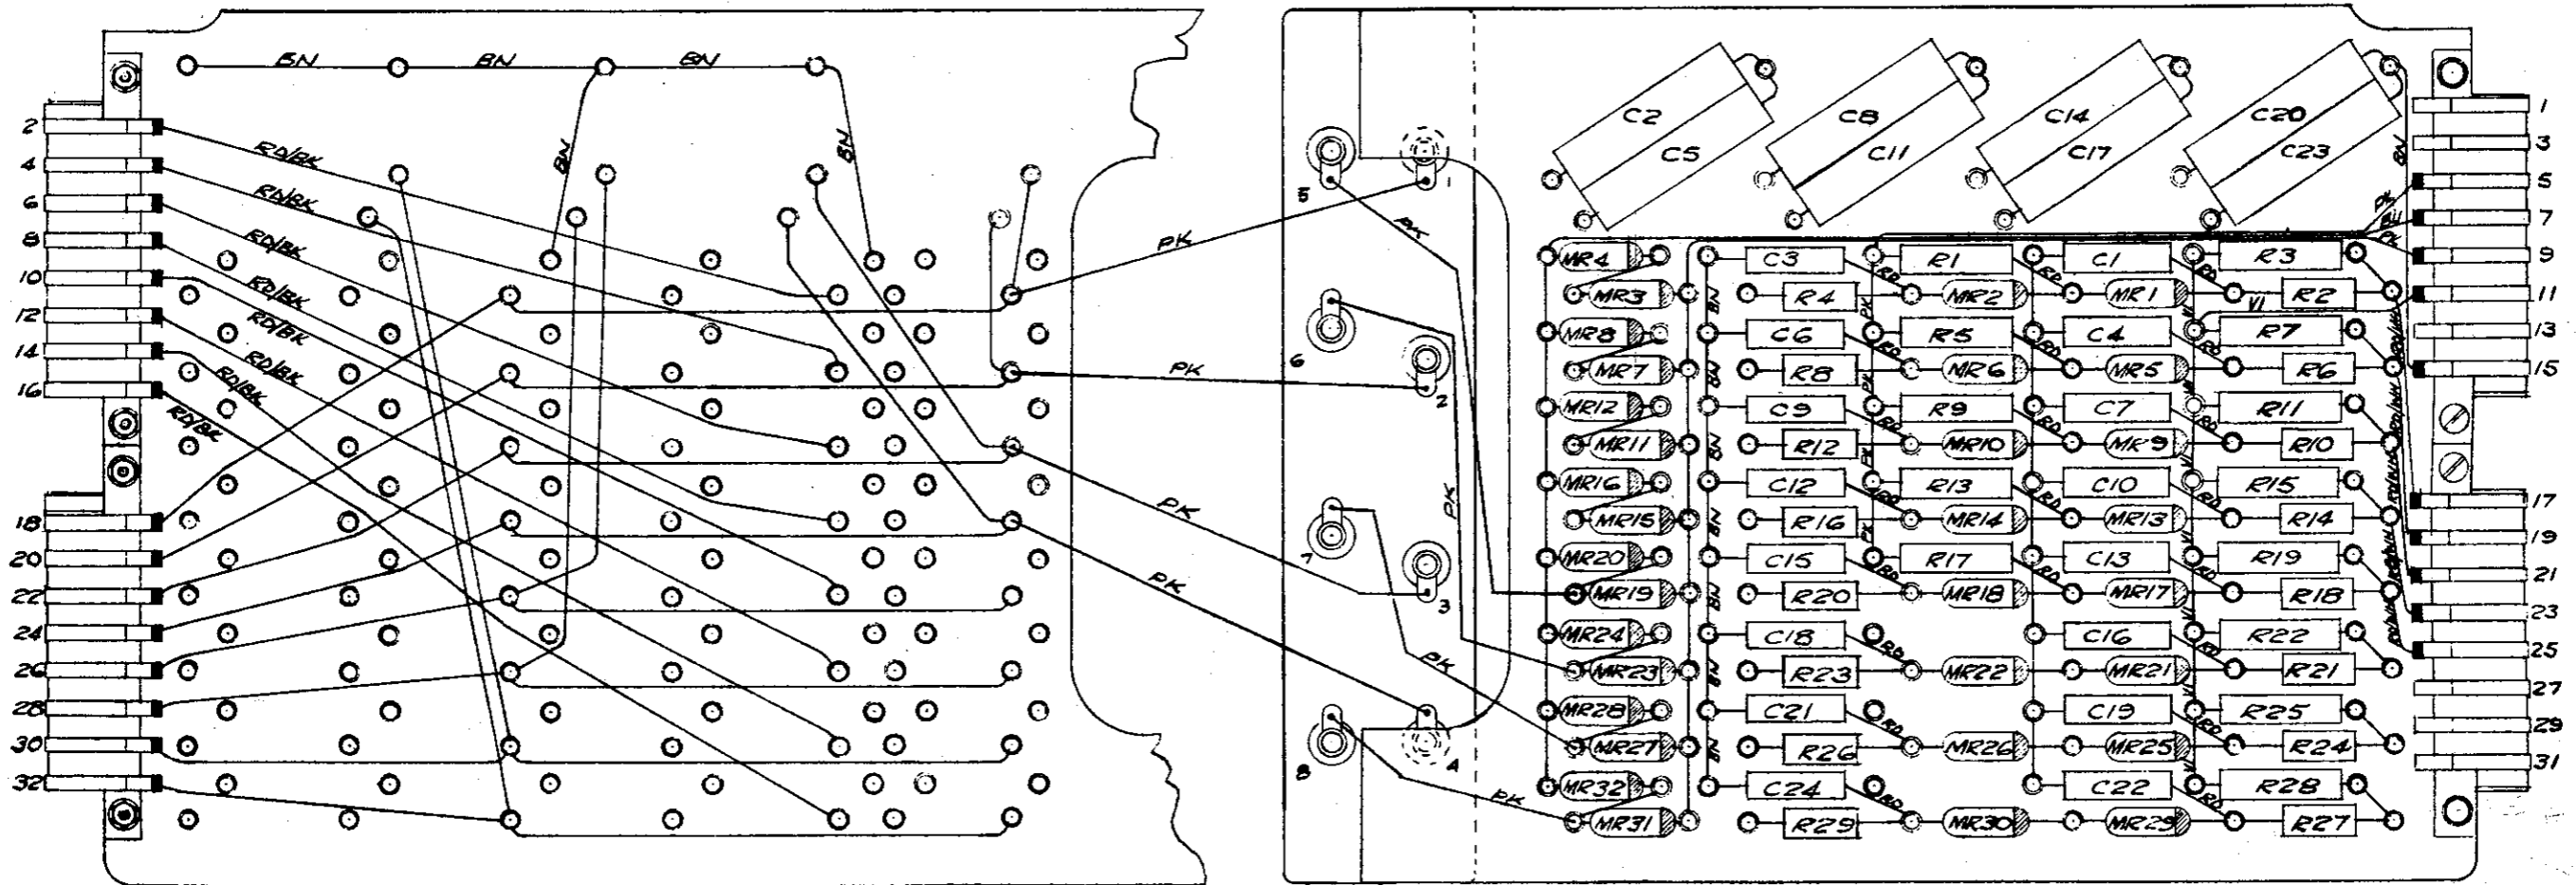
READ - SWITCH CONTROL, TYPE 19 (LAYOUT)
